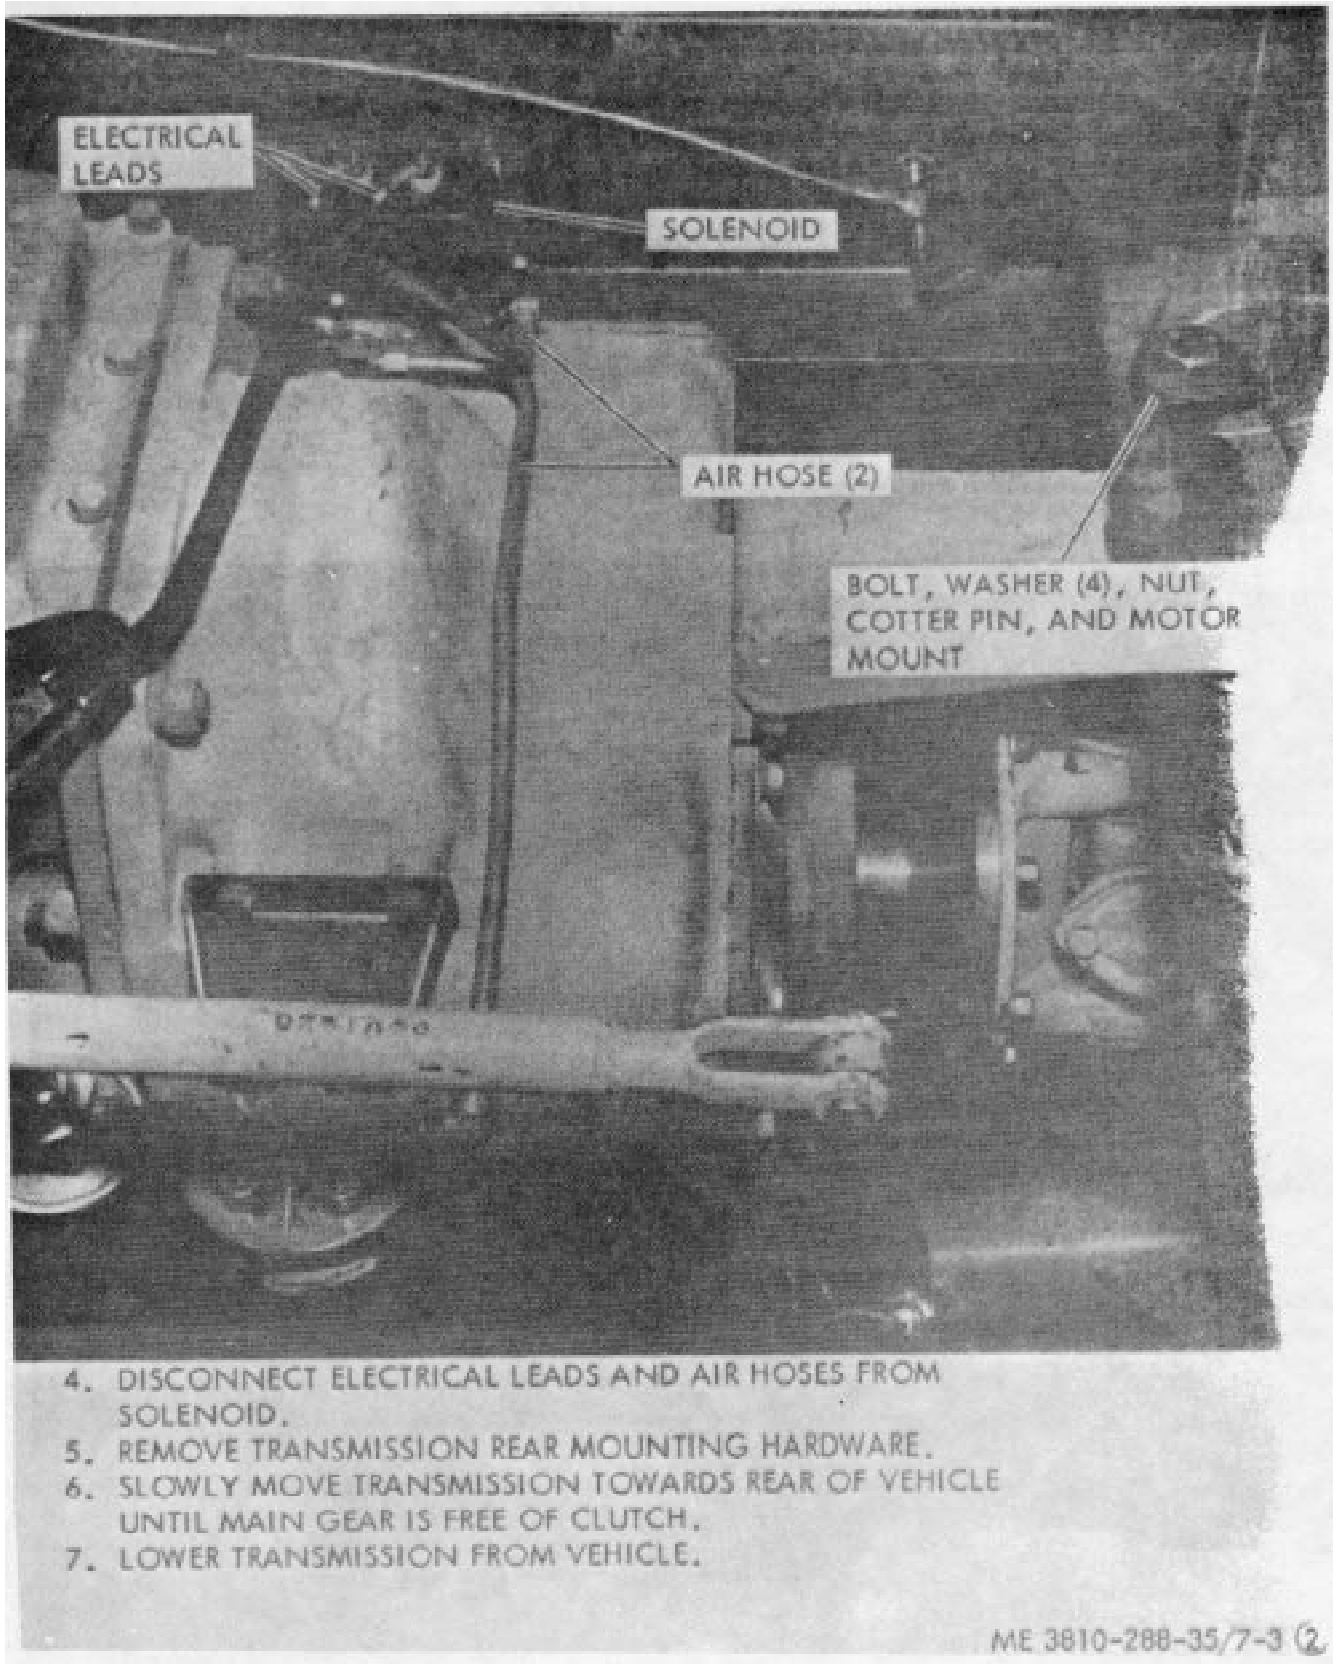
Transmission assembly, removal and installation . (Sheet 2 of 2)
